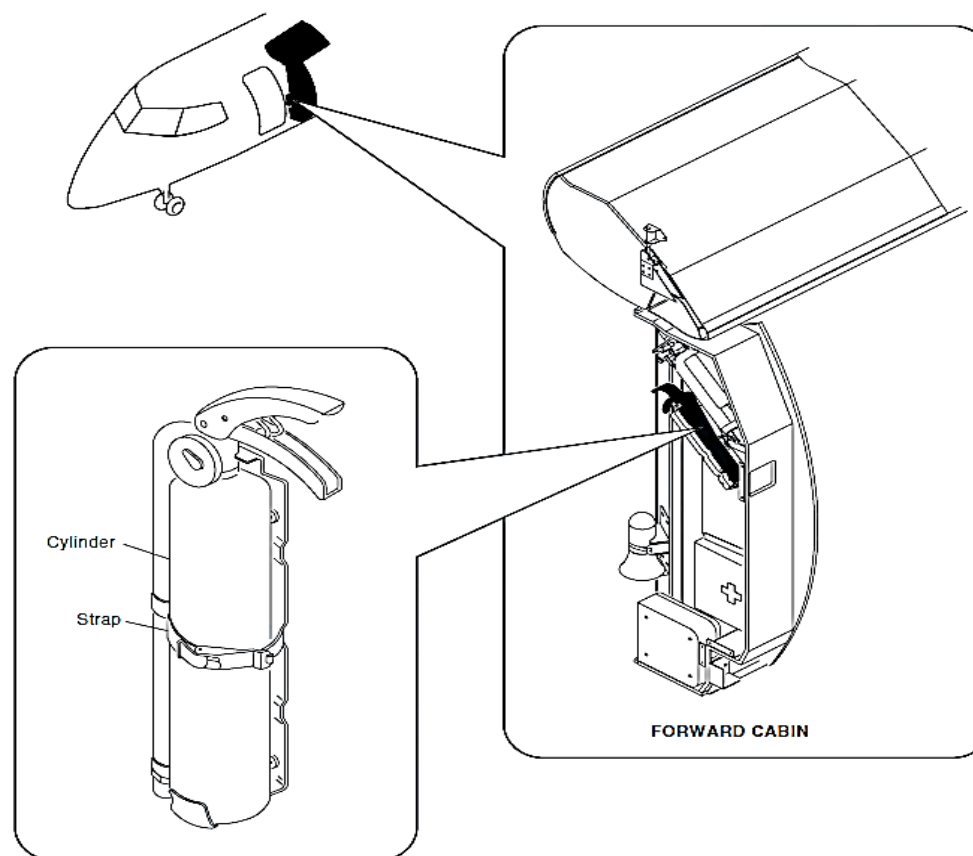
FIGURE - HAND OPERATED FIRE EXTINGUISHER - FWD PASSENGER COMPARTMENT
